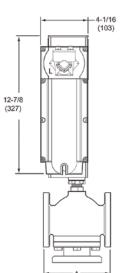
Mx61-720x with 2½" to 5" VB-8303 Flanged 3-Way Globe Valves
